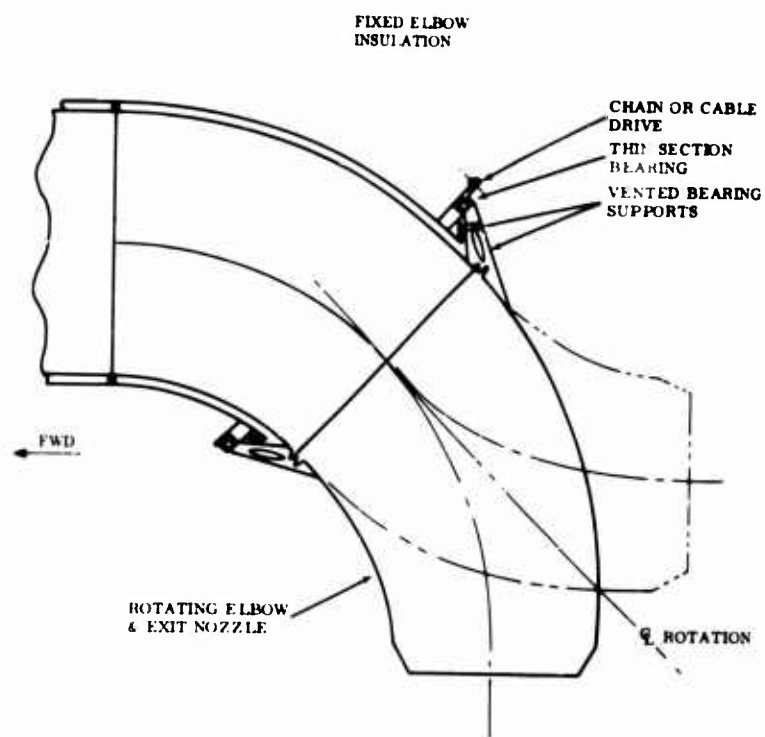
Rotating Elbow Diverter, Located at End of Tailpipe.
